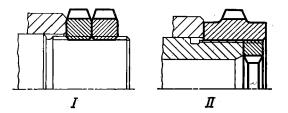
Circular nuts fixed by I-regular lock nut; II-male-threaded lock nut
